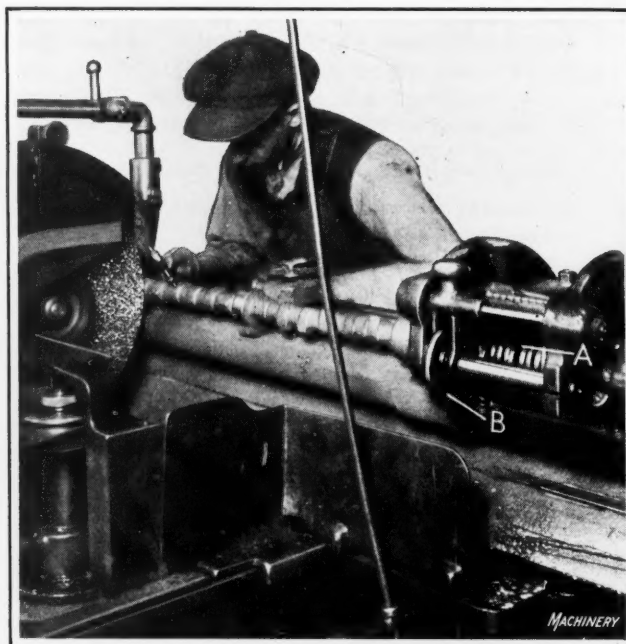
Rear View of Grinding Machine showing Mechanism which controls the Cam-grinding Operation
